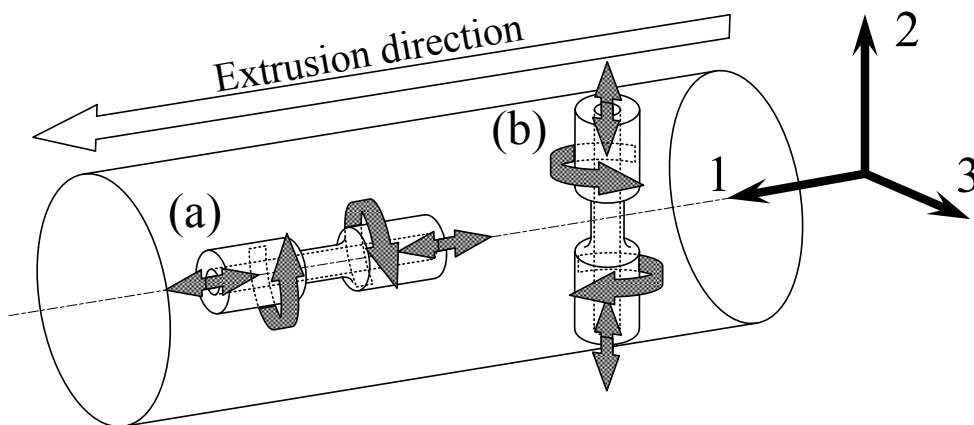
Cutting directions of specimens (a) parallel to extrusion and (b) perpendicular to extrusion with coordinate axes and sampling directions of extruded AZ31 magnesium alloy.
